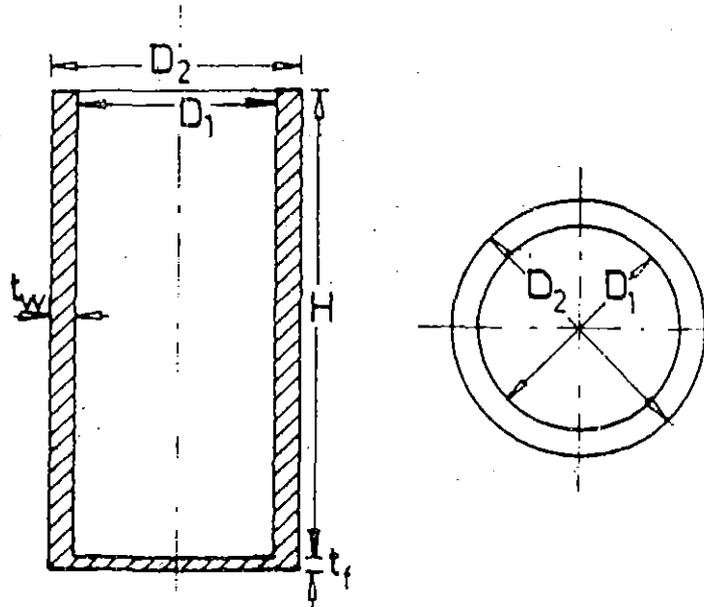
The Shape of a Straight Type Steel Drum Biogas Plant
